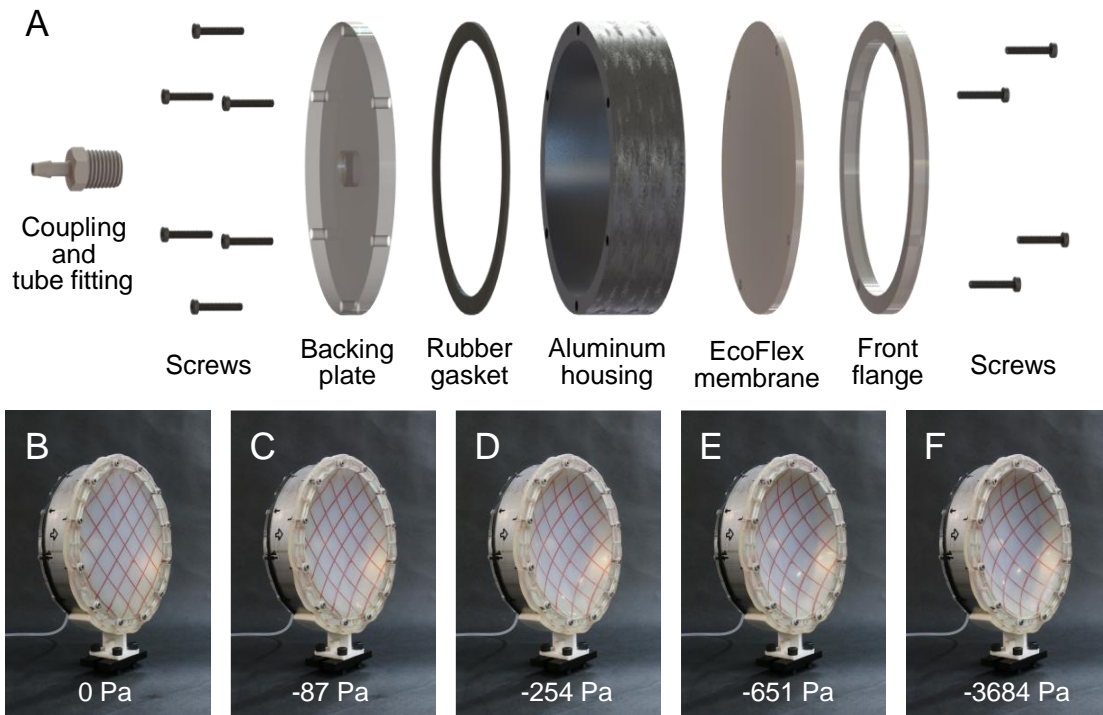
(A) Exploded-view illustration of the components of the vacuum cylinder: Laser cut transparent acrylic glass (backing plate and front flange), neoprene rubber gasket, and aluminum cylinder with 6.35-mm (0.250 in) wall thickness, 3-mm thick membrane of Ecoflex 00-10, tube fitting and screws. (B-F) Photographs of the deformed system under five different vacuum levels from no vacuum (left) to maximum deformation (right).
